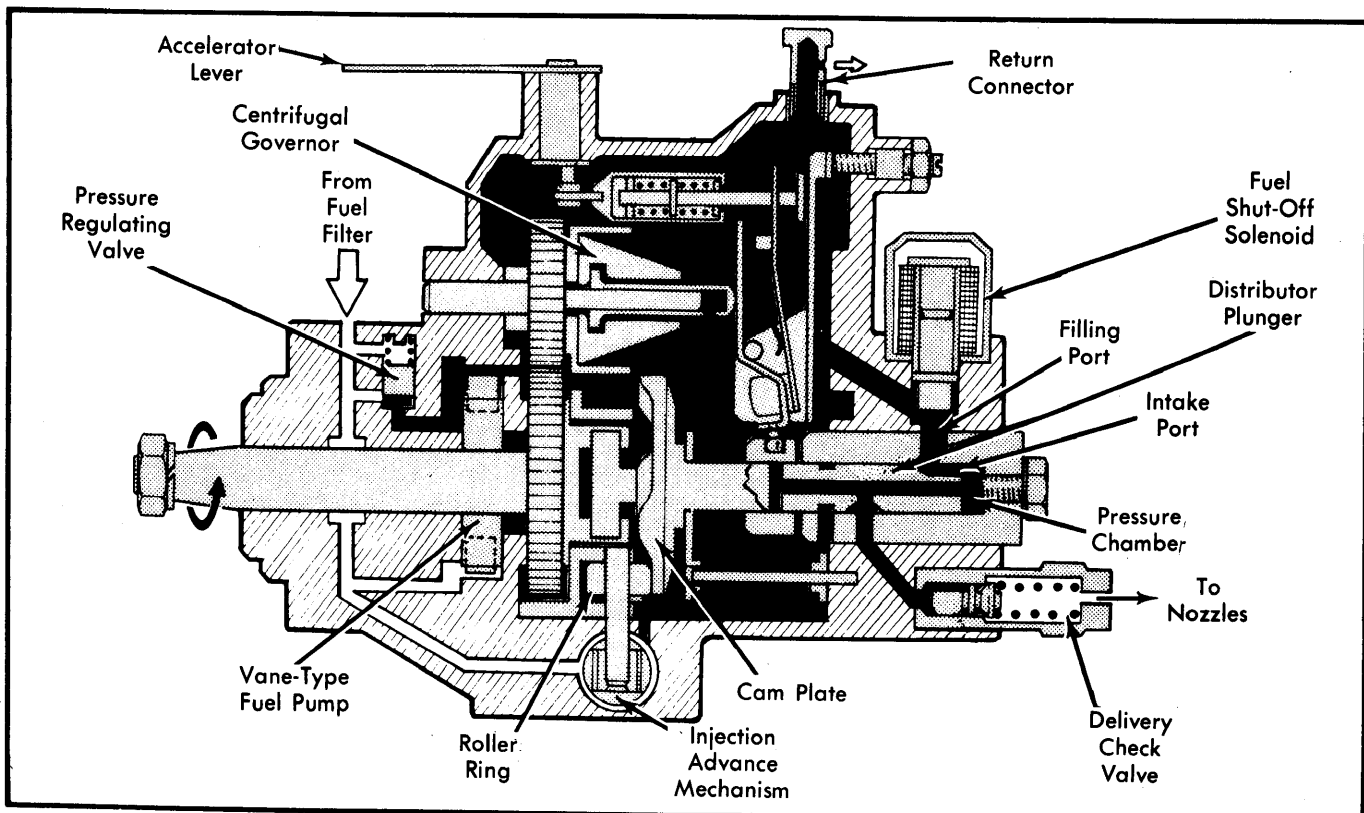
Cutaway View of Volvo Fuel Injection Pump
